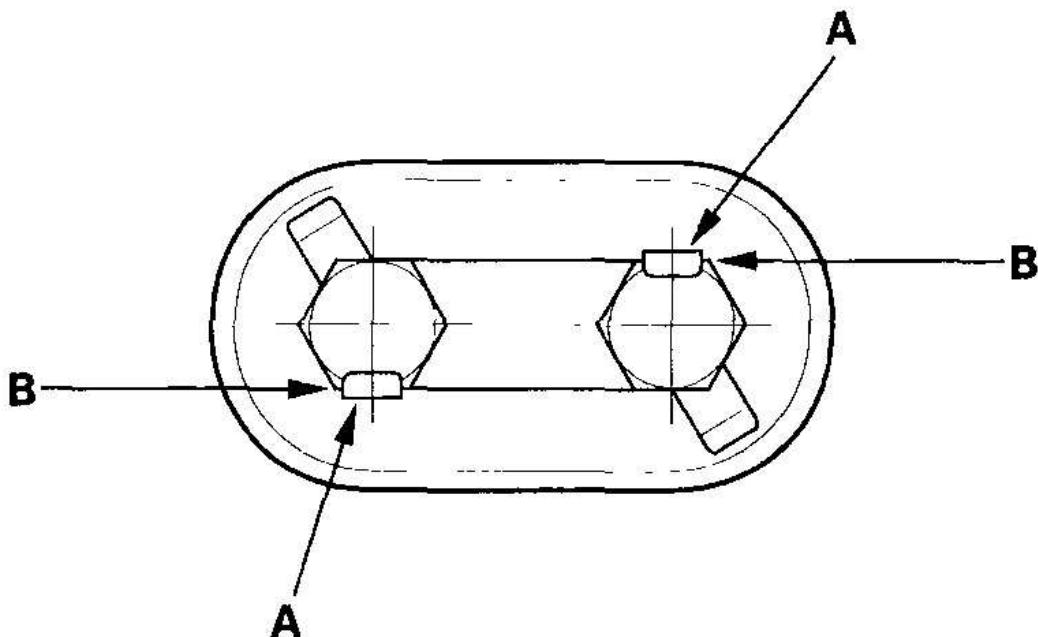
Removing Steering Gearbox On Passenger's Side And Remove Driver's Side First
